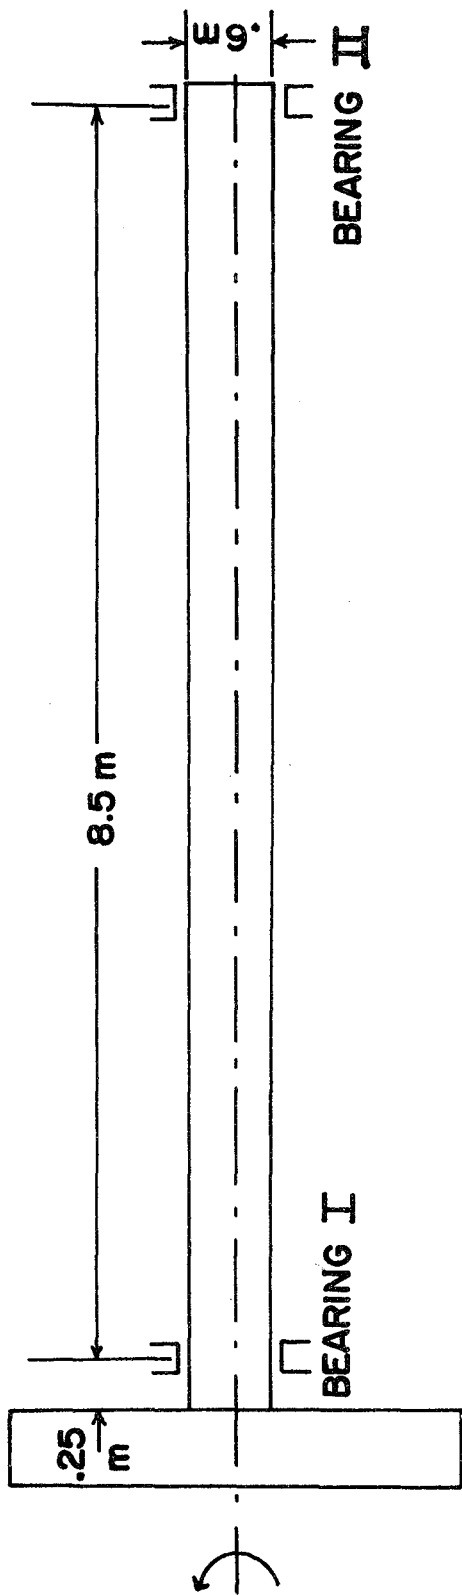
ROTOR - BEARING SYSTEM FOR EXAMPLE PROBLEM
